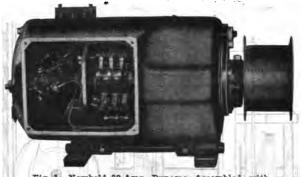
Newbold 80-Amp. Dynamo, Assembled, with Inspection Plate Removed
